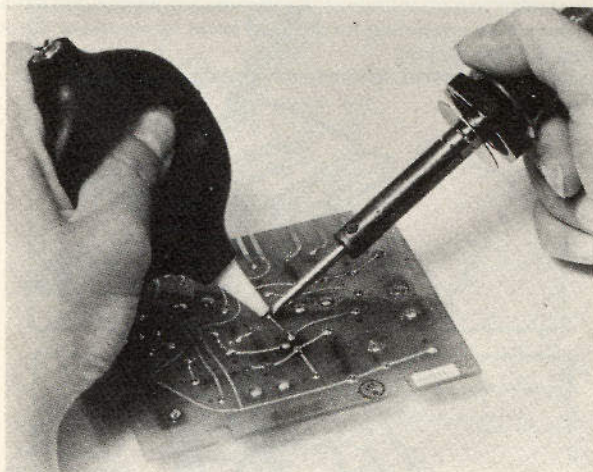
Solder removal by solder sucker technique.¹⁰
